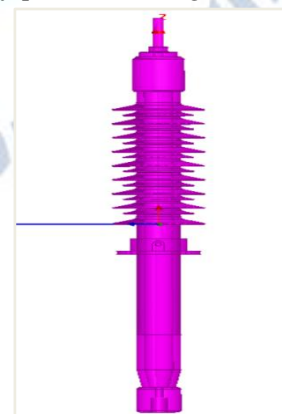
3-Dimensional model of 72.5kV condenser bushing
